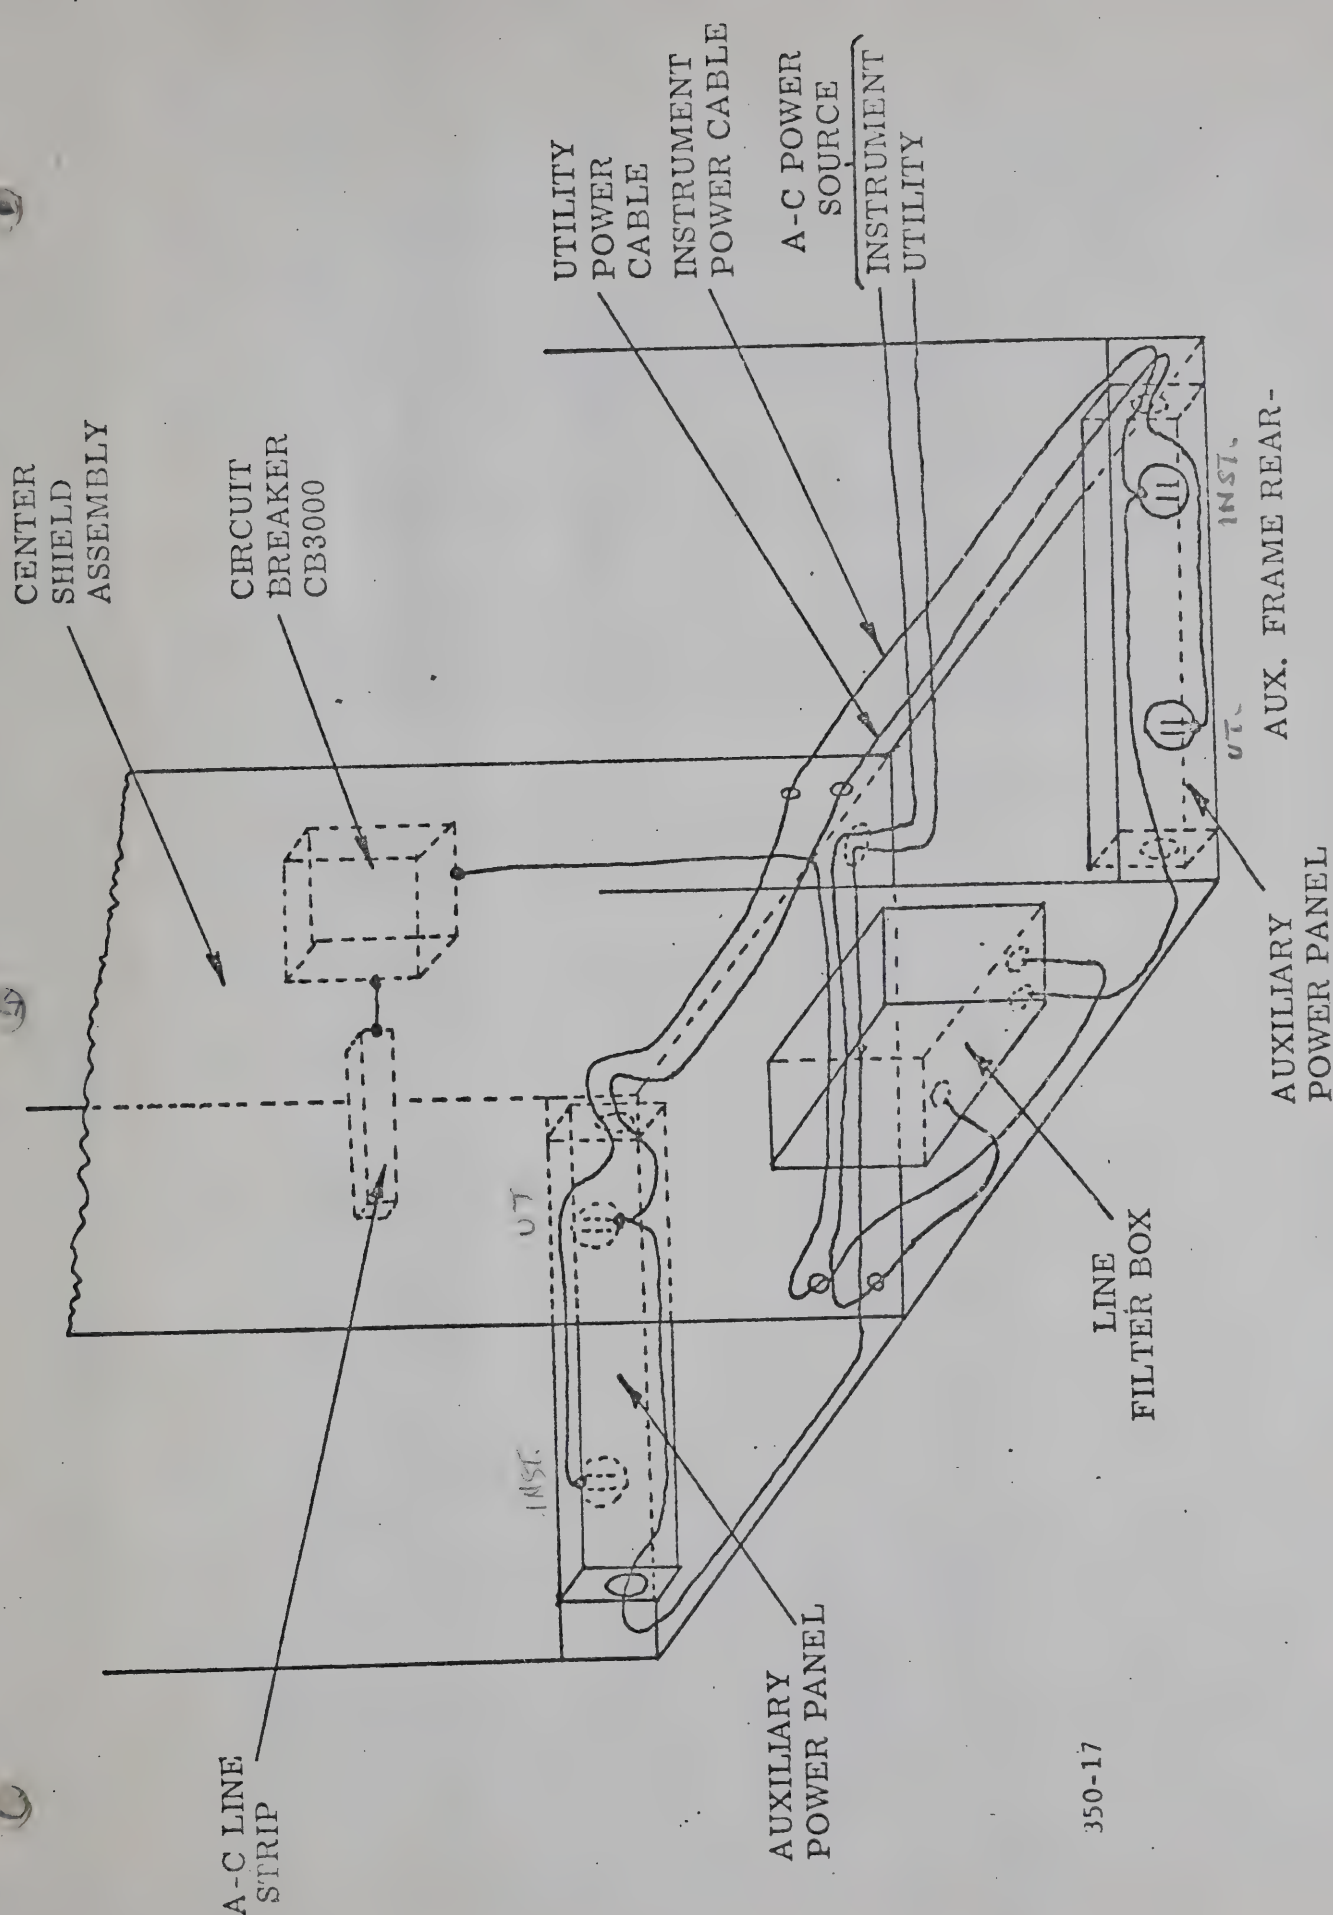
Utility and Instrument Power, Cable Connection Diagram
